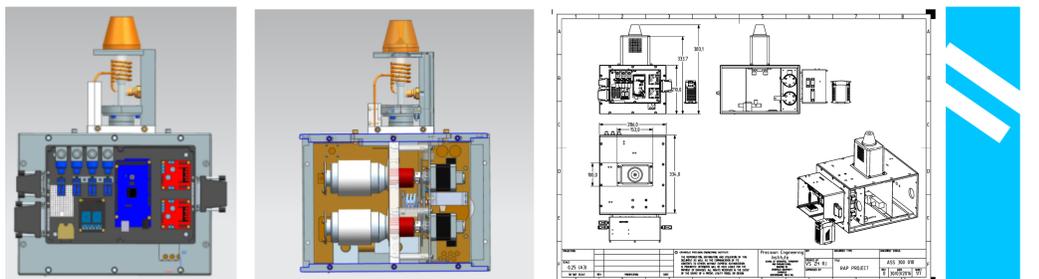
Electrical components (left), Mechanical components (middle) and Assemble engineer drawing (right)
